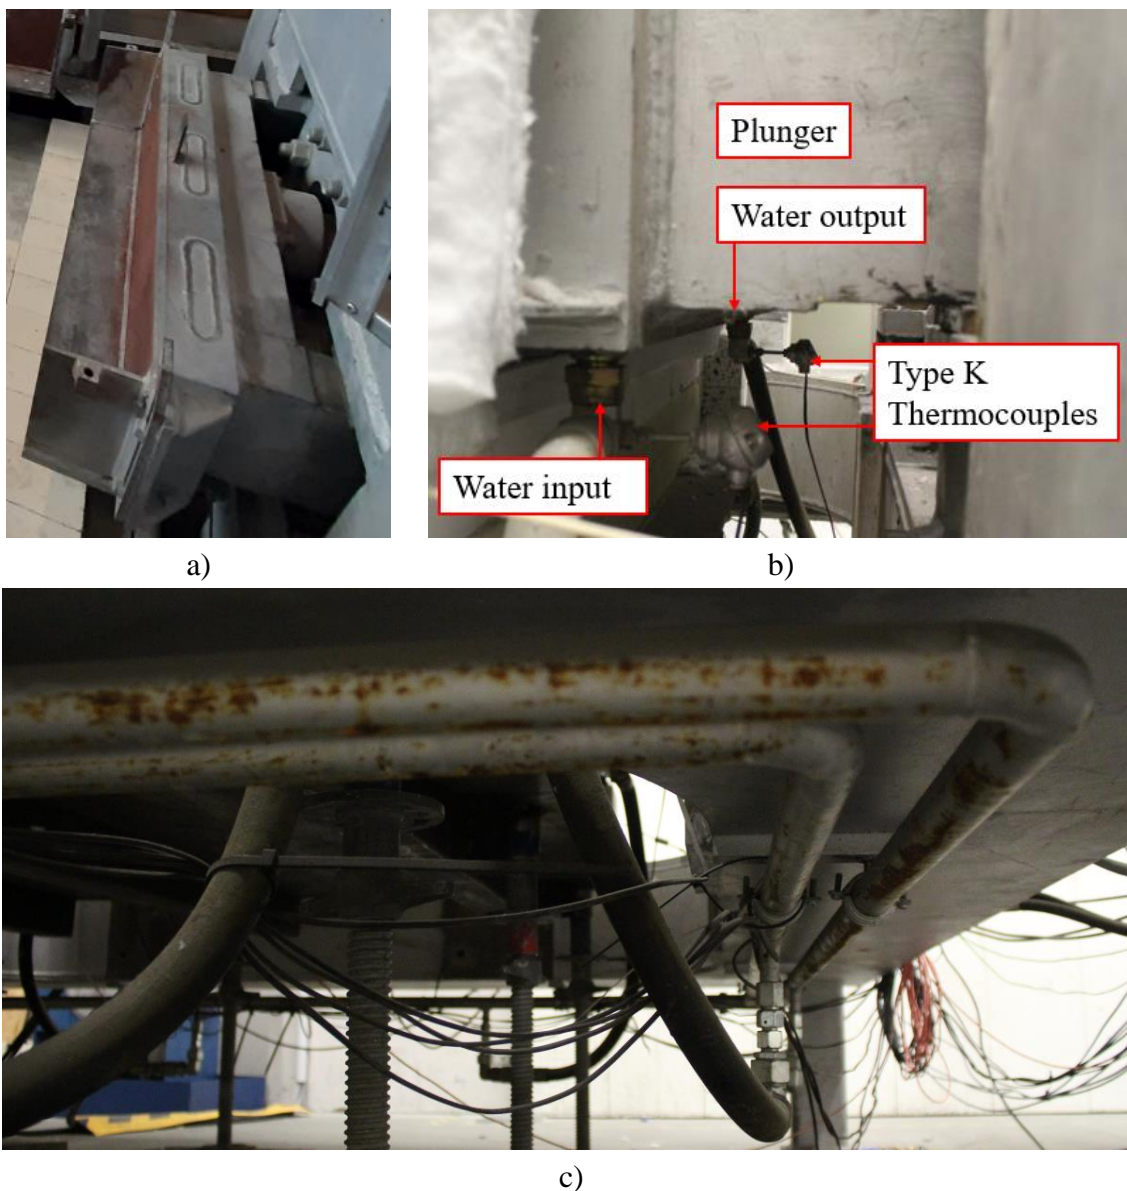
Water cooling details: a) Cooled part of plungers; b) Thermocouples of the system; c) Pipes
